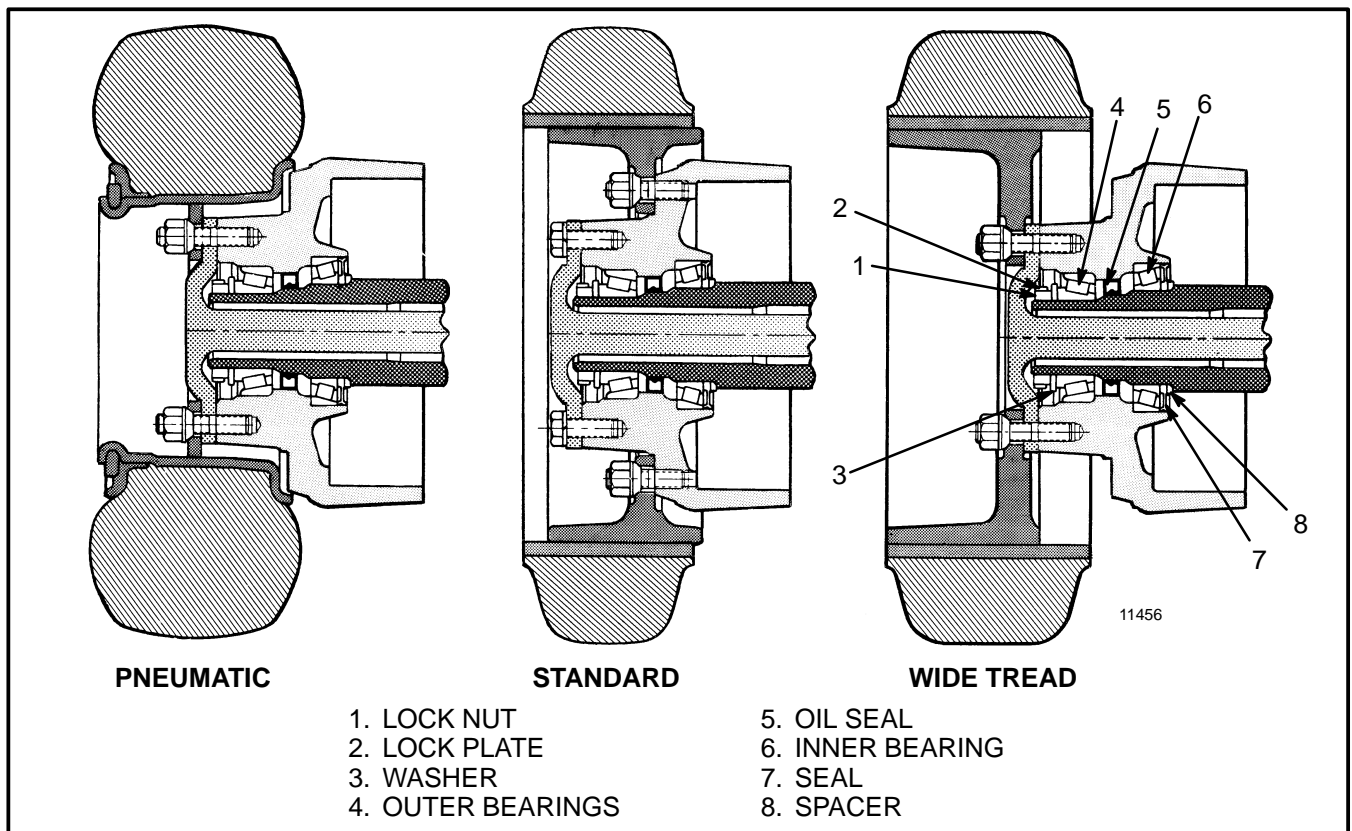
DRIVE WHEEL MOUNTING (E/J1.25-1.75XL [E25-35XL])
